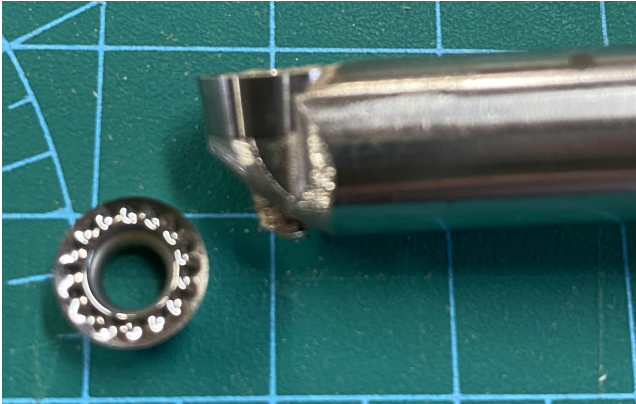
The pocket cut into the shaft to hold the insert with the edges relieved to allow internal hollowing.
